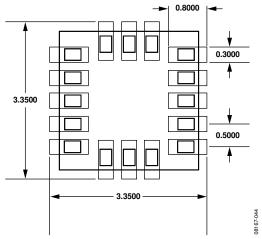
Recommended Printed Wiring Board Land Pattern (Dimensions shown in millimeters)
